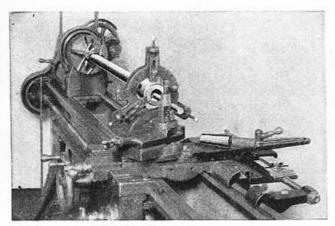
Lathe Equipped with Center Rest and Taper Attachment for Boring Tapers
